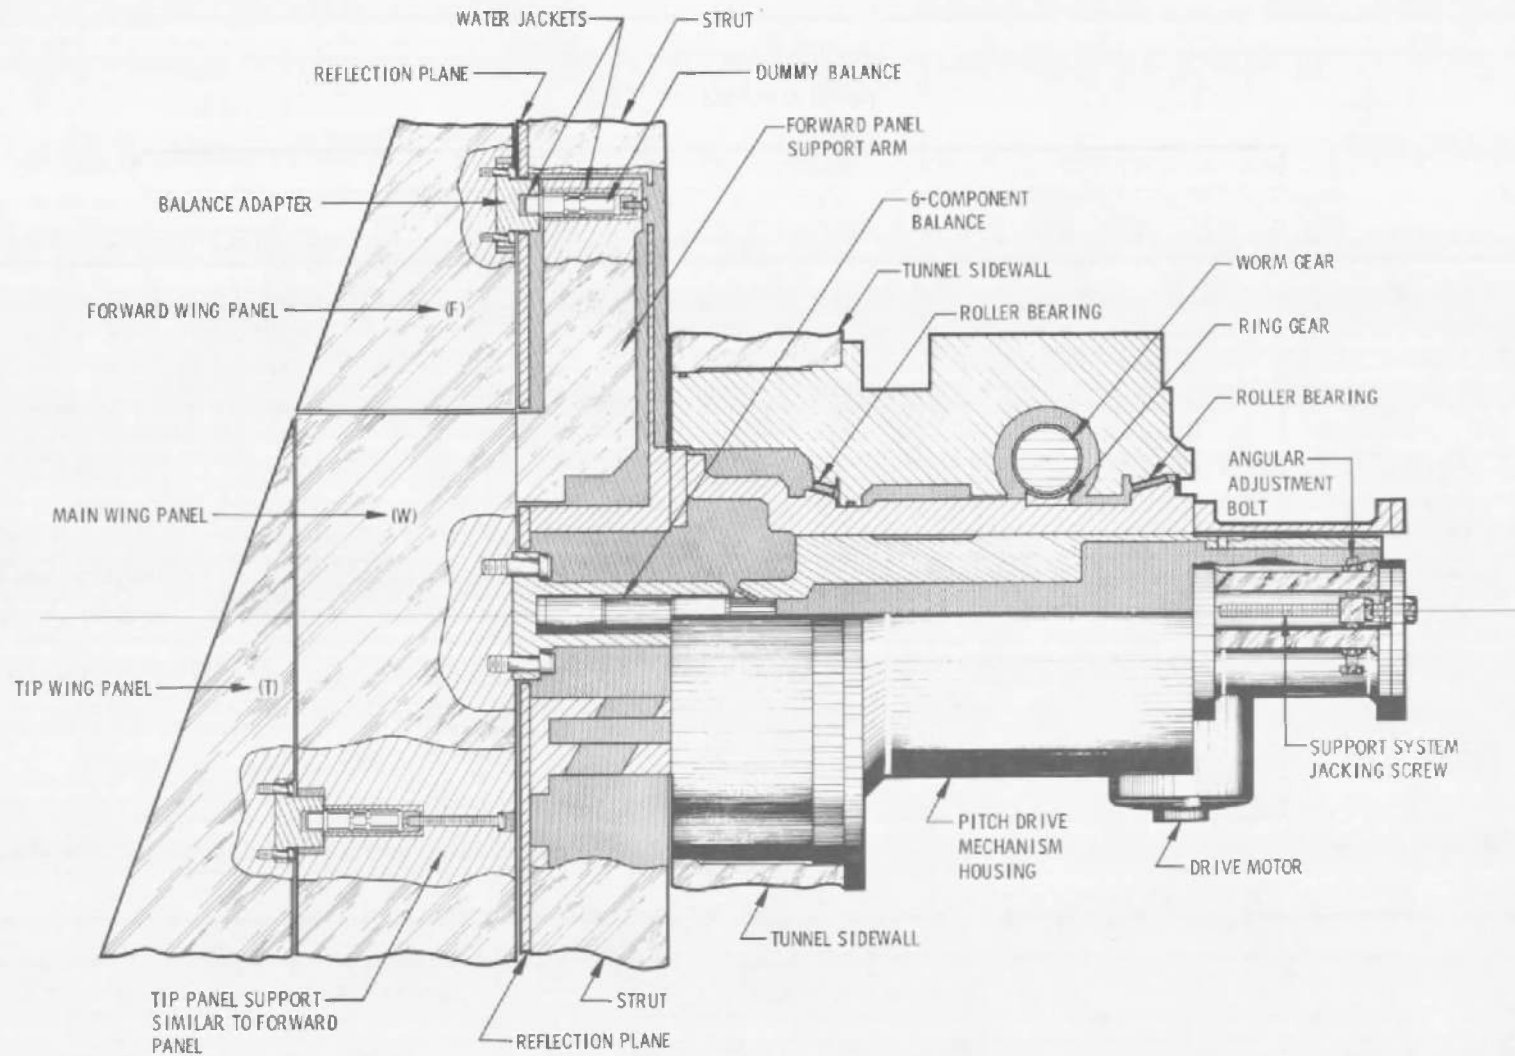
General Arrangement of the Sidewall Angle-of-Attack Mechanism and Model Support Details
